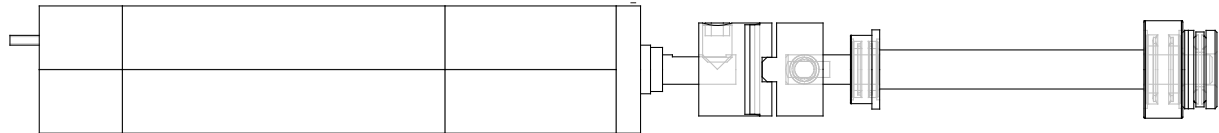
Finger Drive Assembly (without Drive Nut)
